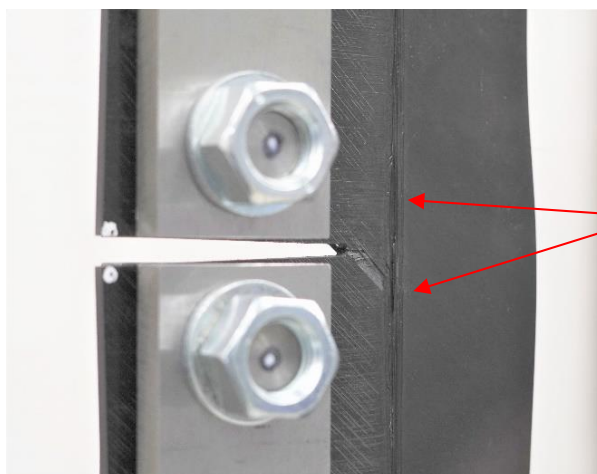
Test 2 specimen showing no stringer damage after compressive failure at the rear. Triangular black area on the stringer is the stringer bulging out as compressive failure in the skin underneath it has created a thicker damage zone in the skin.
